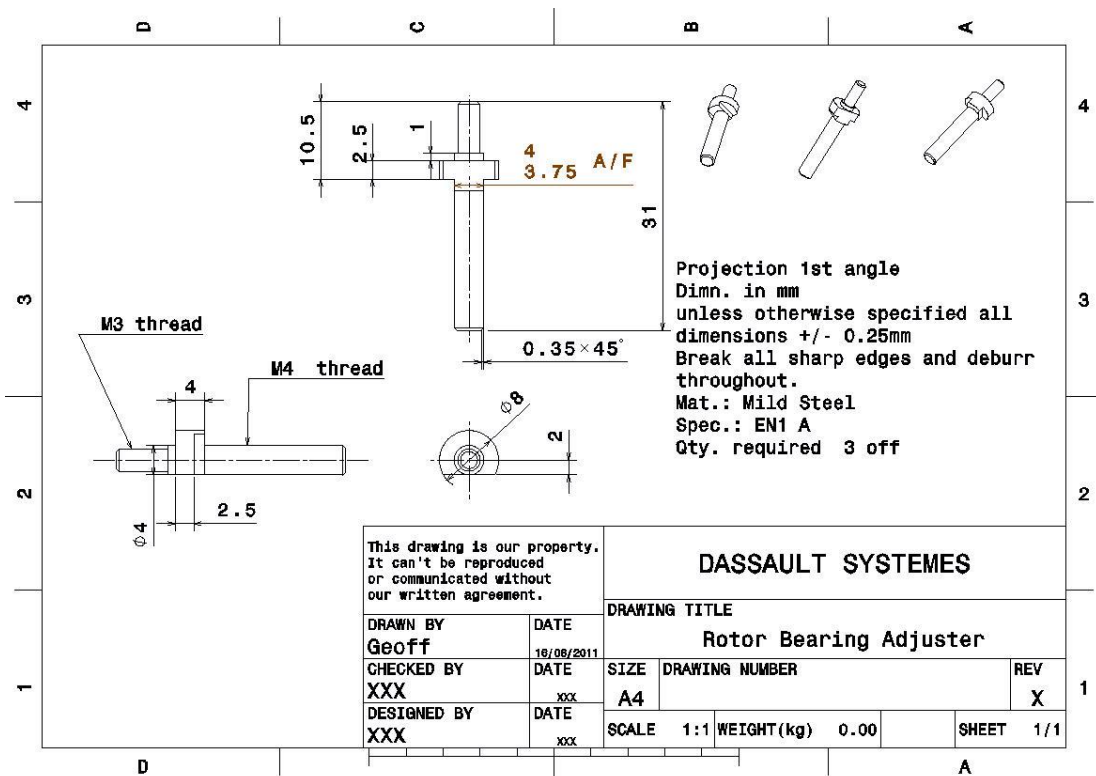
A –Rotor Bearing Adjuster: Mark II Thermal Motor
